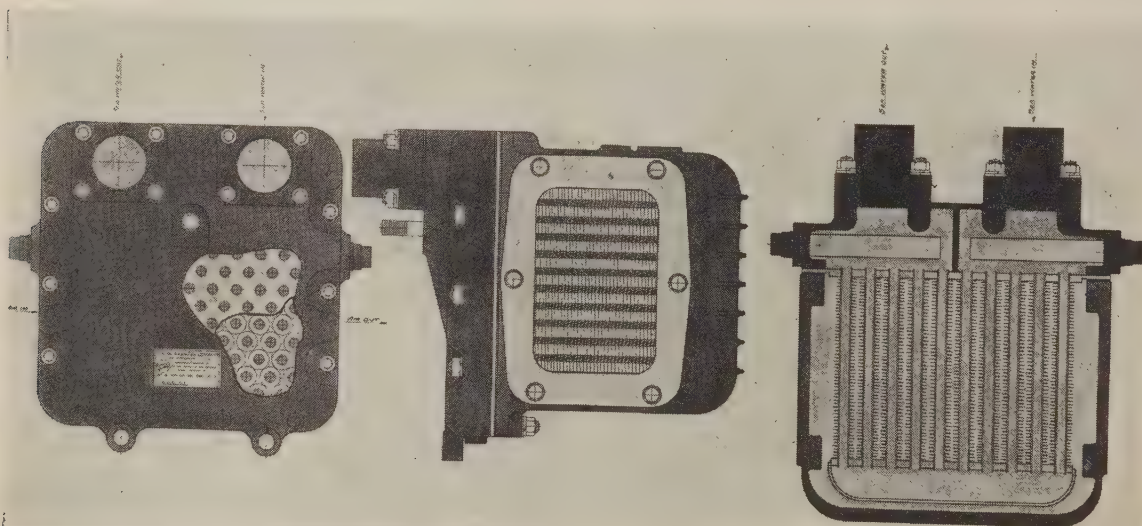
DETAILS OF SUPERCHARGER INTERCOOLER HEAT EXCHANGER
